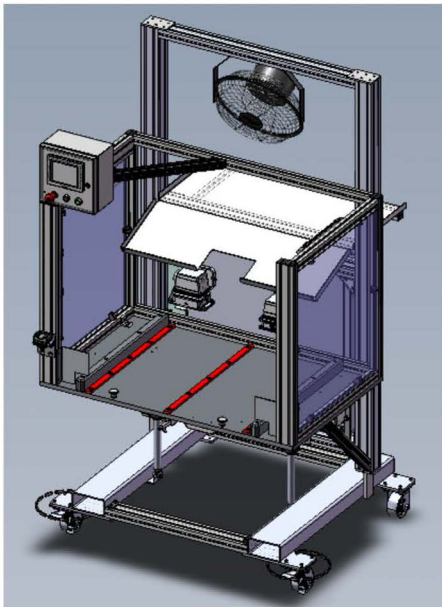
The stand-alone assembly type machine allows fixtures to be changed.
